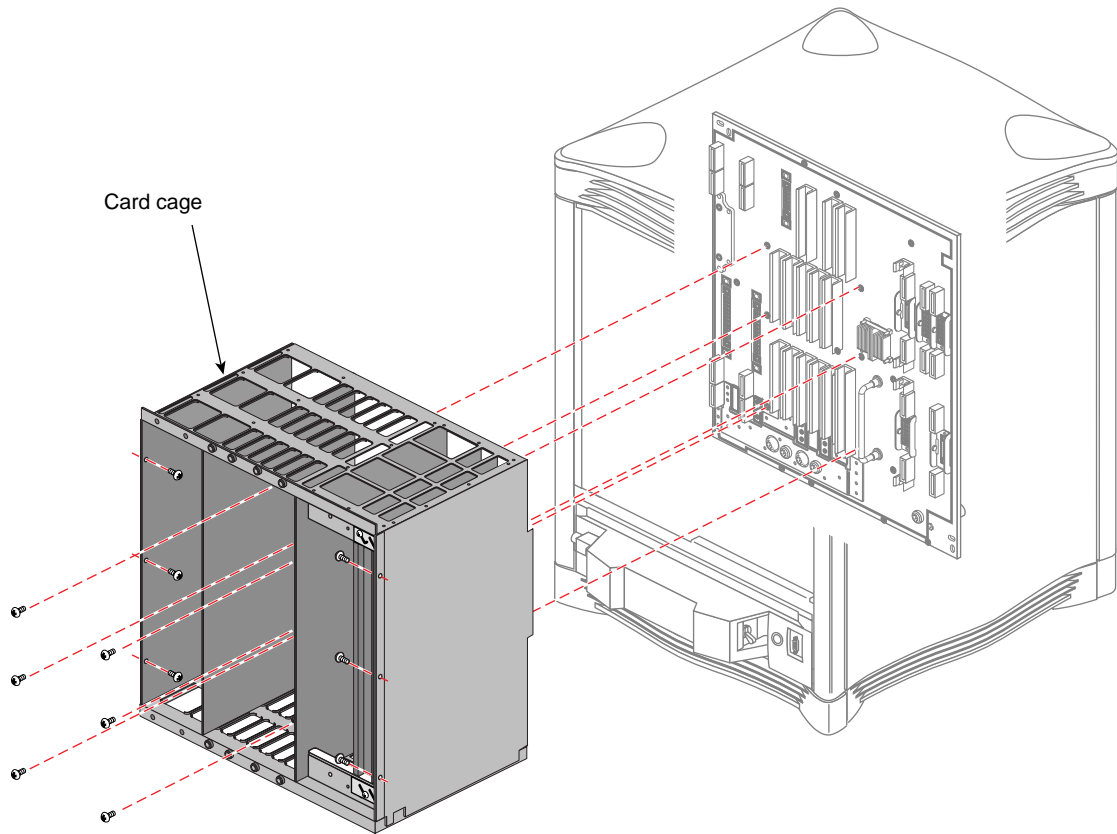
Removing the Onyx2 Deskside Card Cage
